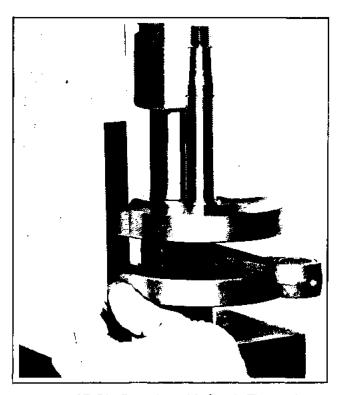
E-74. Pressing with Crank Throws in Alignment using Straight Edge
